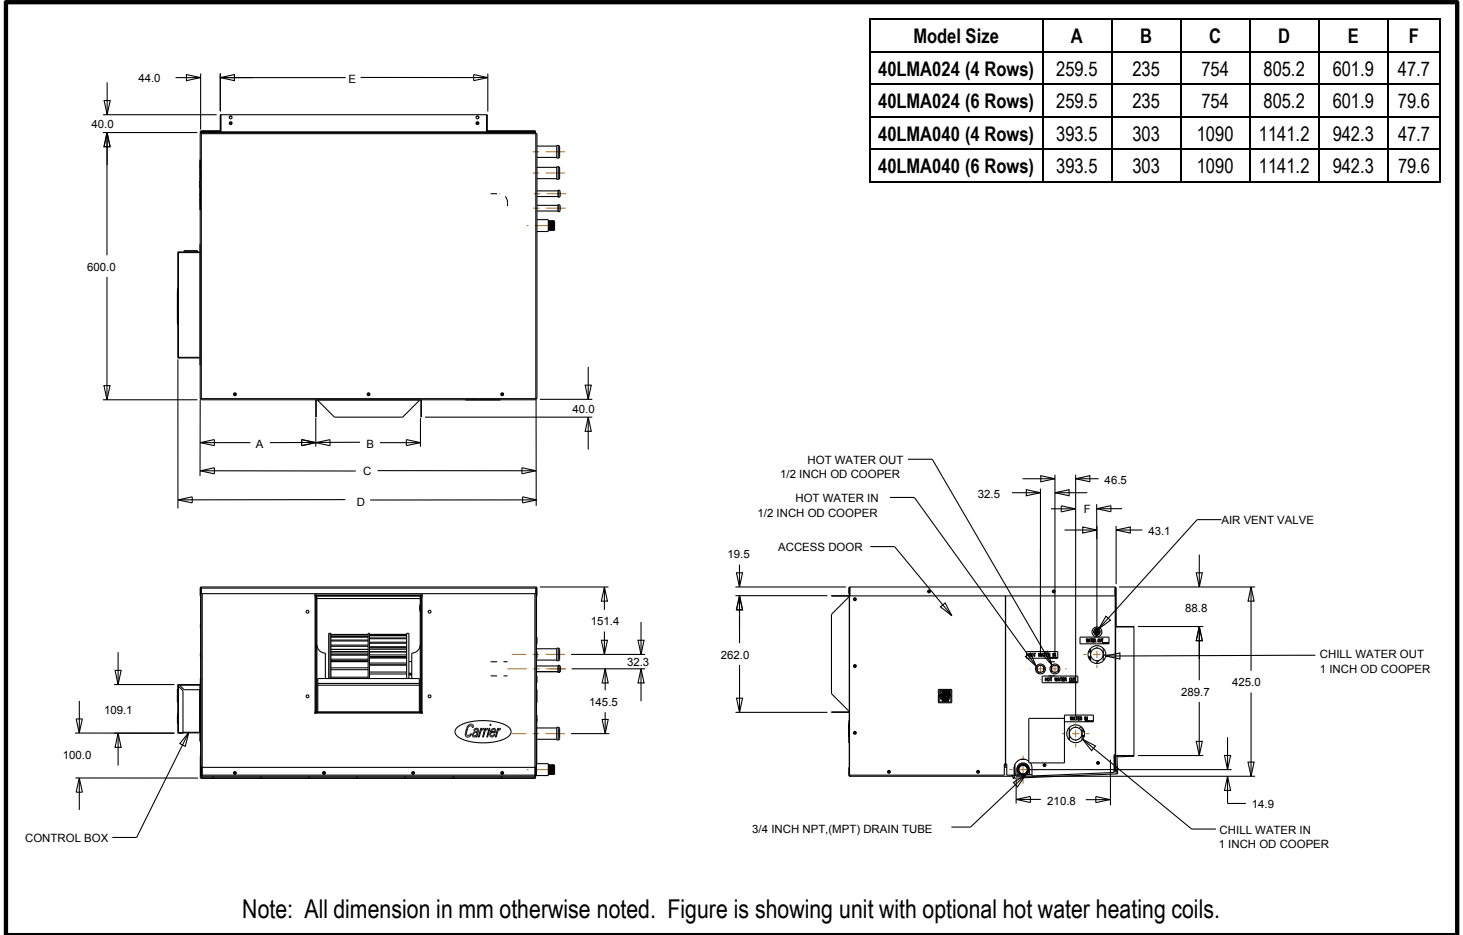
40LMA024/040 (4 or 6 row) Dimensional Drawing
